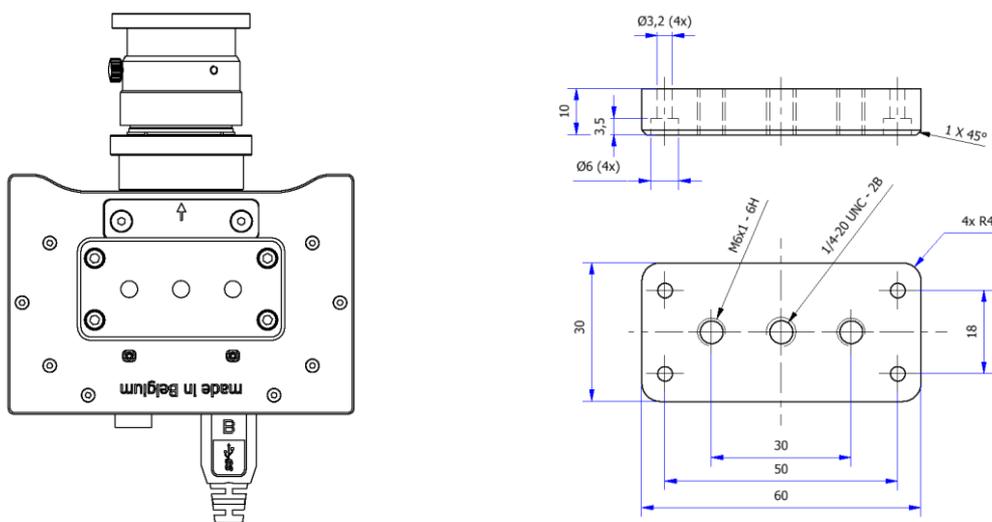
Top and side views of the tripod adapter plate along with its dimensions (all dimensions are in millimeter)
